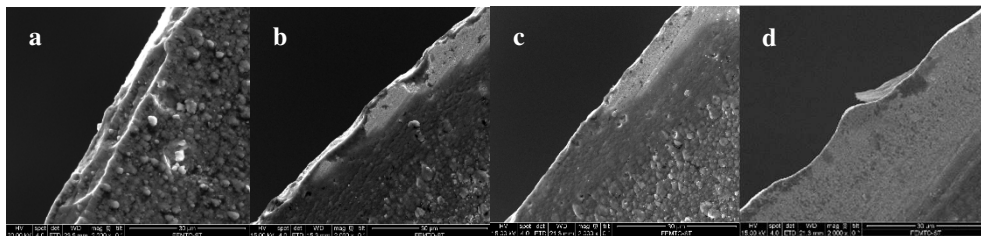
Overview of a new cutting edge (a) and after 4,960 (b), 11,360 (c) and 17,760 mm (d) of machining
